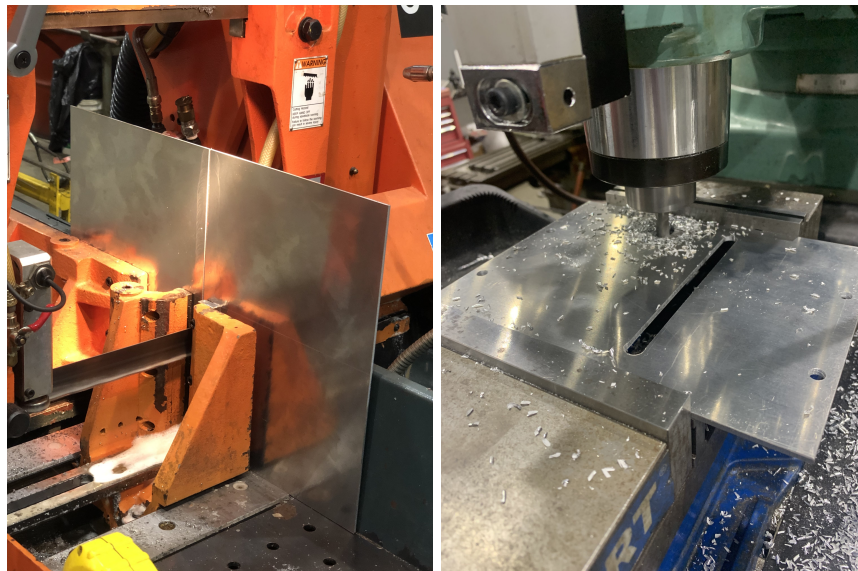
Panels cut with programmable bandsaw and ProtoTRAK Mill
